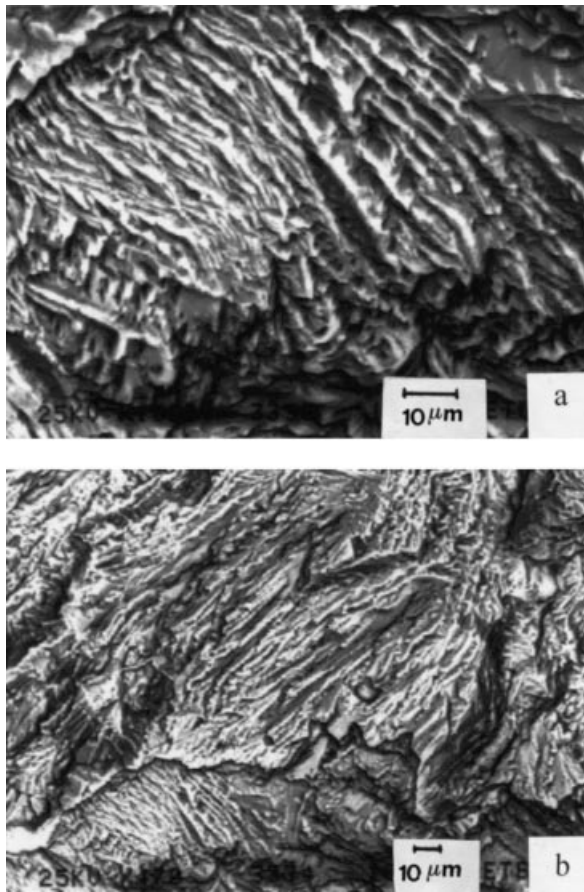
Fracture surface of weld zones: (a) weld 1, AISI 2205(c); (b) weld 3, AISI 2205(c).
